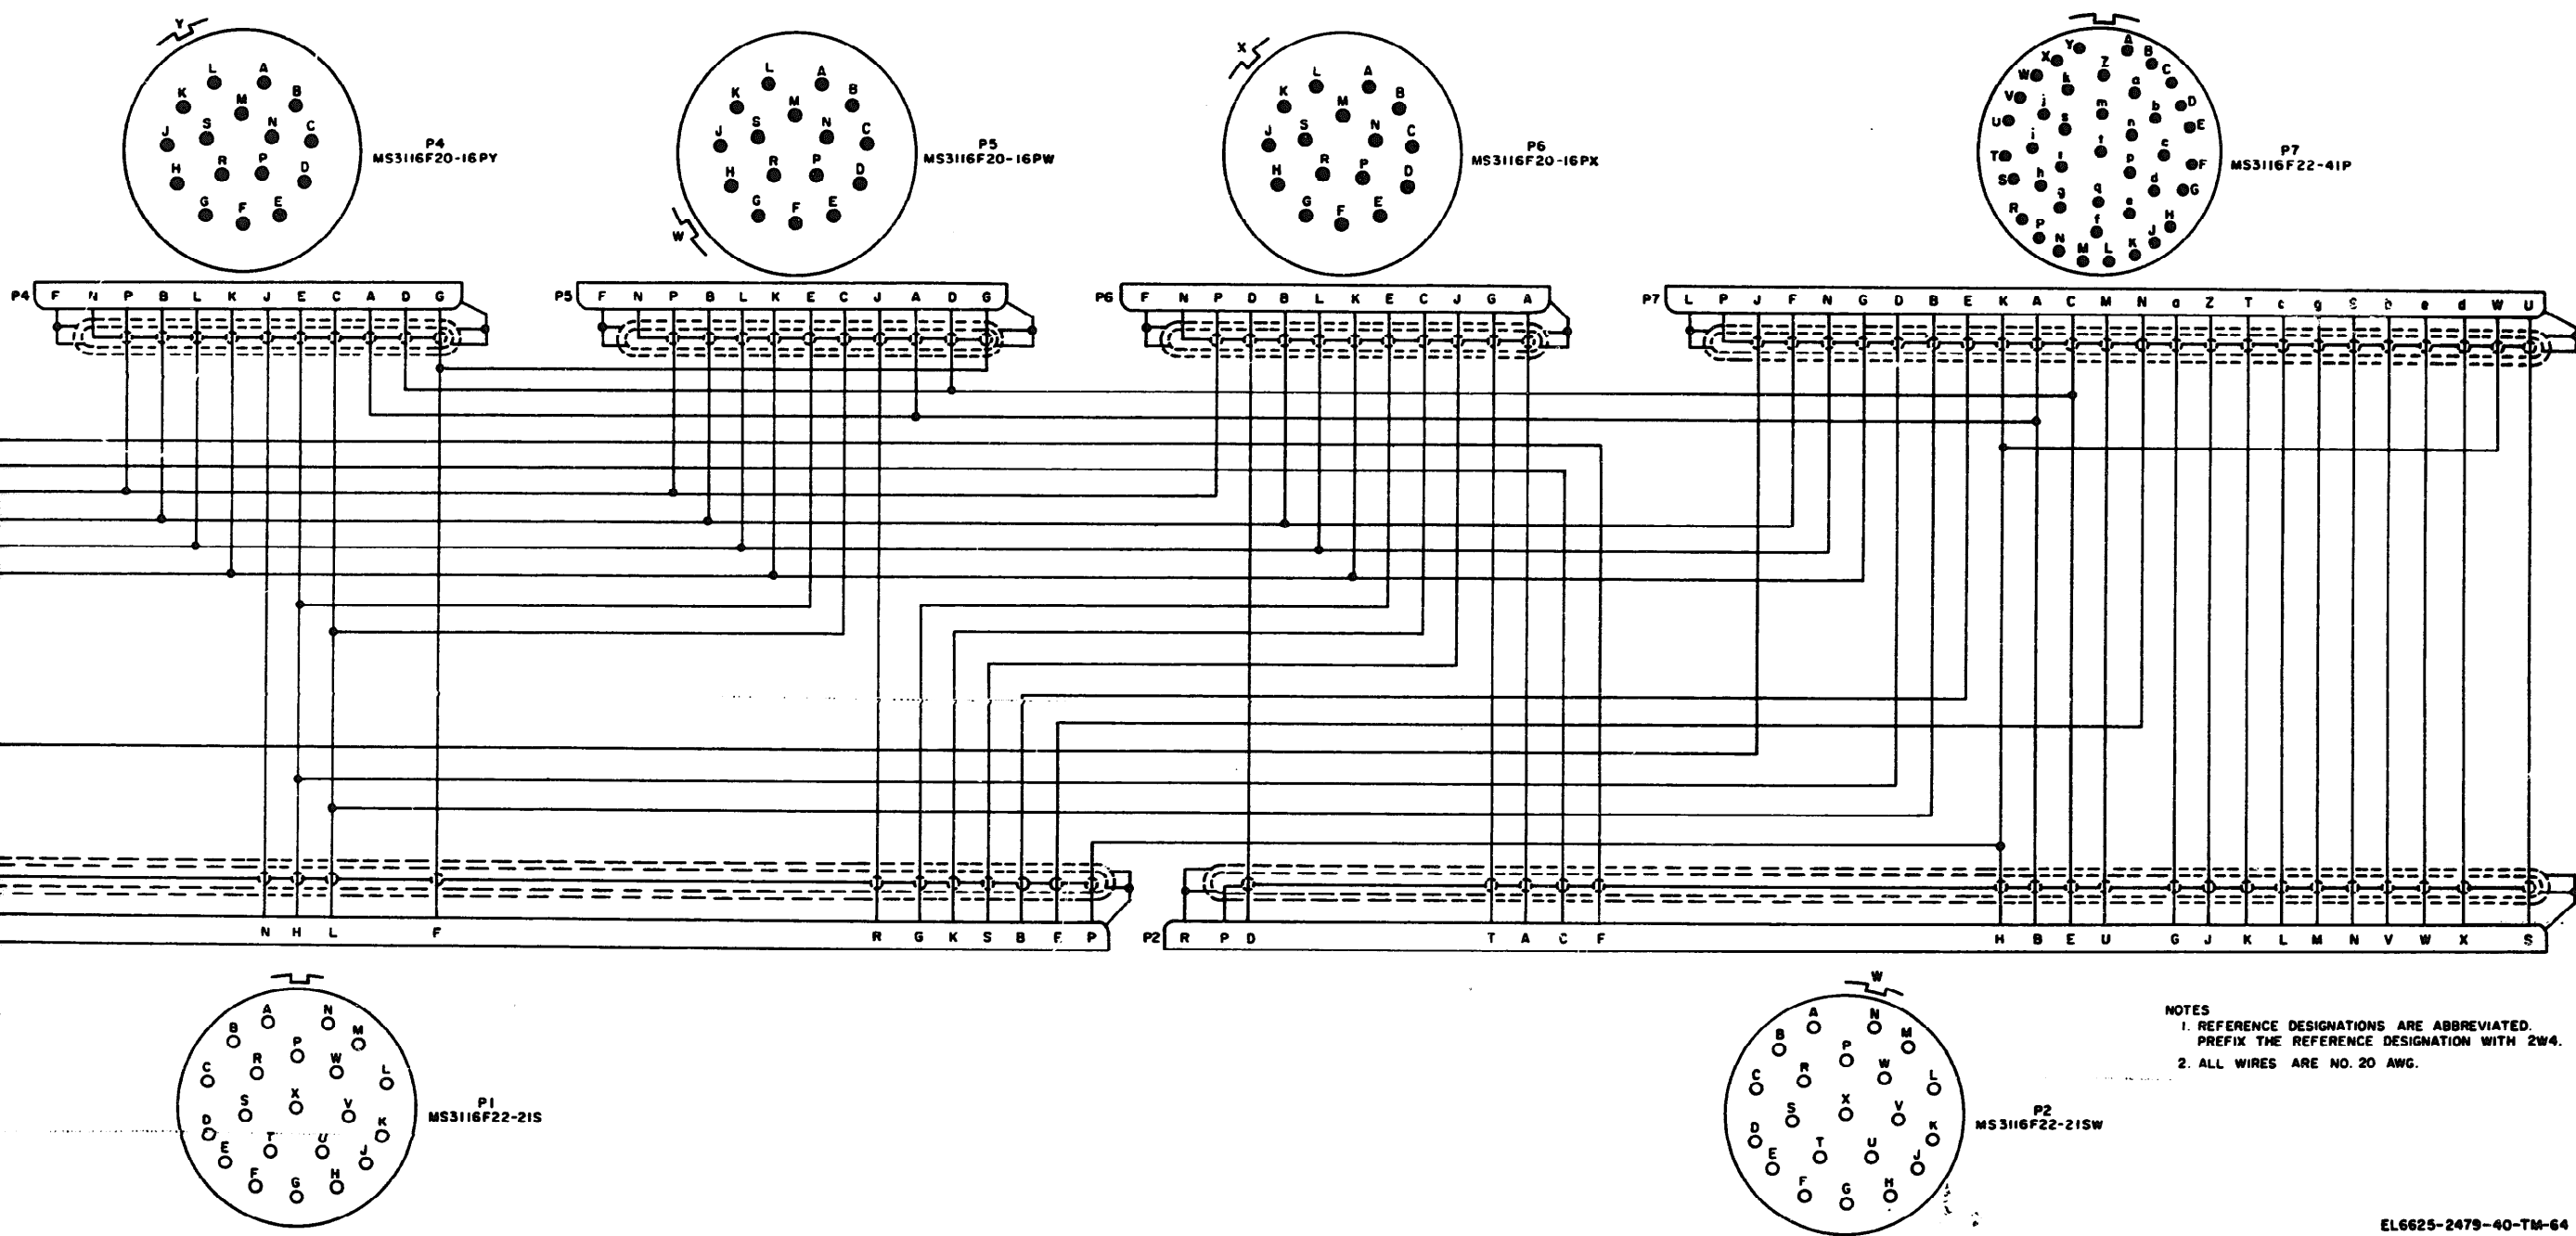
Cable Assembly, Special Purpose, Electrical, Branched CX-12717/AYM-8, wiring diagram.
